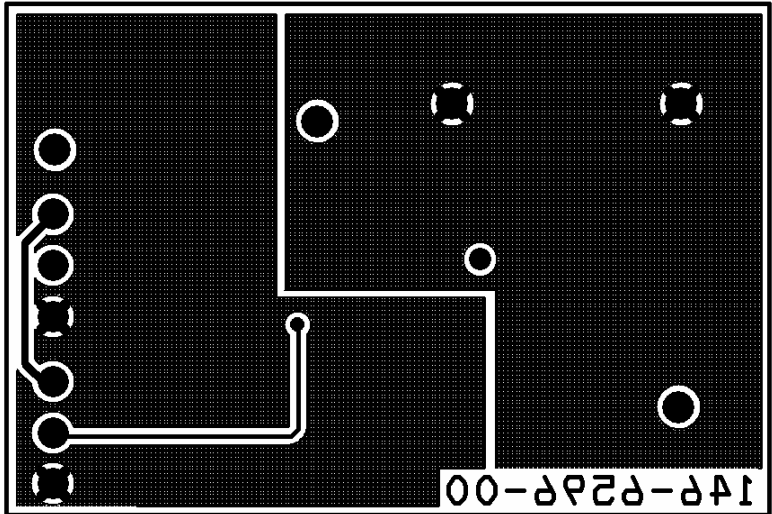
SP6654EB PC LAYOUT BOTTOM SIDE
